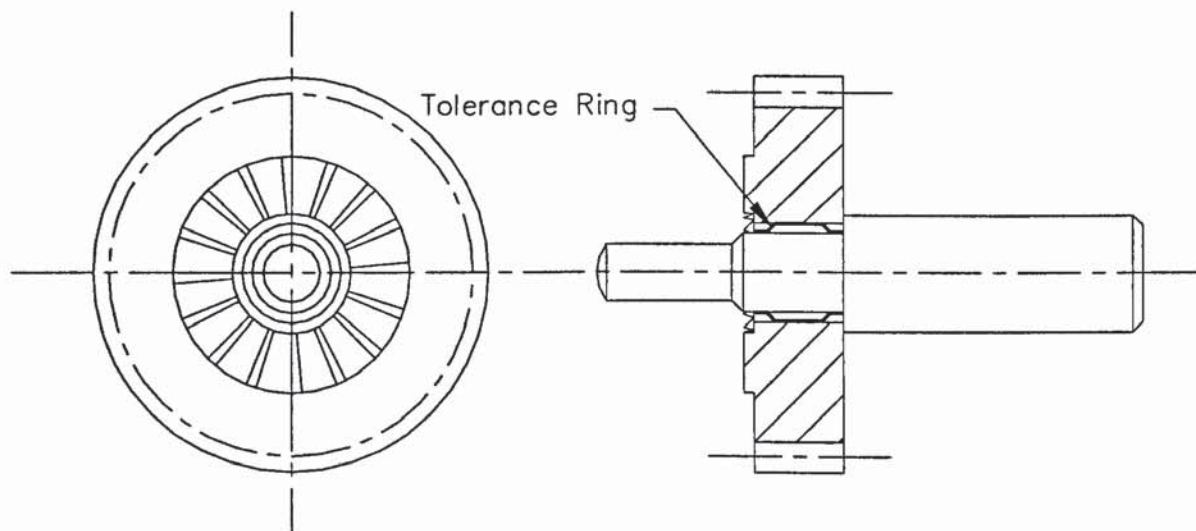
Drawing of spindle assembly with tolerance ring
